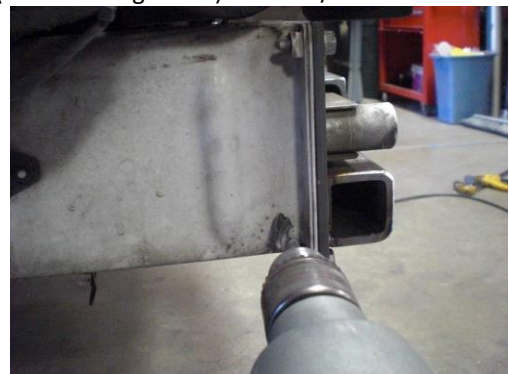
Drill Two (2) Equally Spaced 7/16" Holes Through the Frame (One (1) Hole Through Frame per Side)
